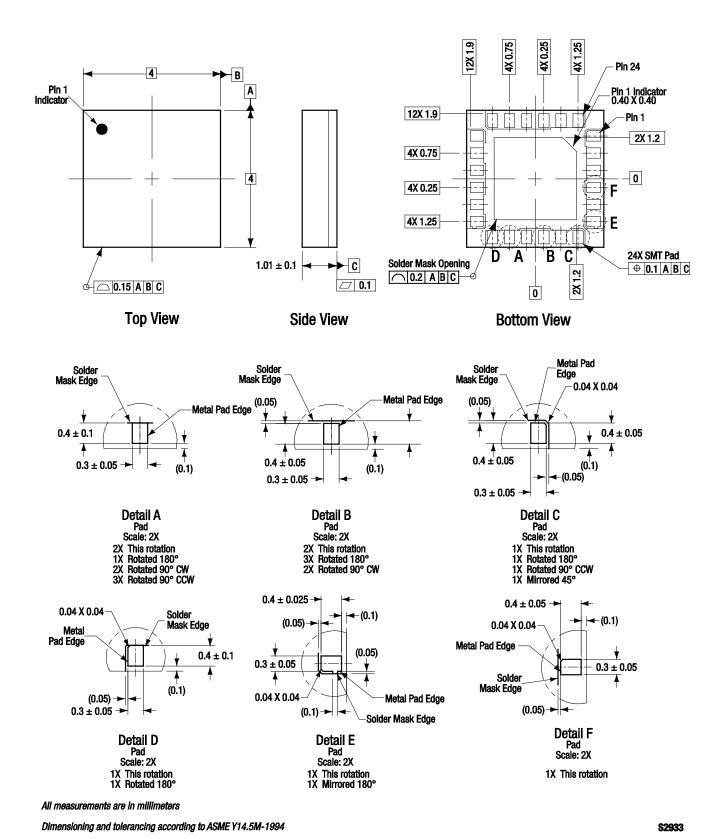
SKY85803 24-Pin LGA Package Dimensions
